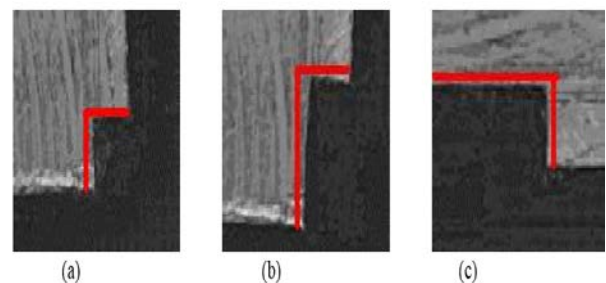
Effect of tool deflection on the machined surface without using optimized results
